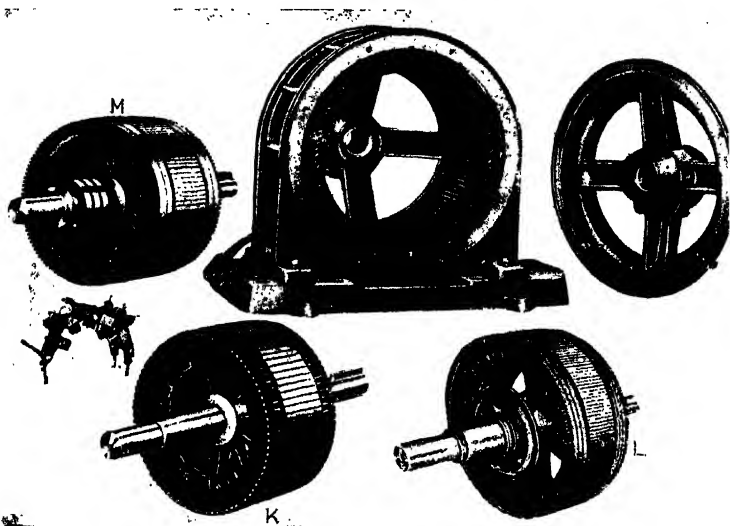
Rotor *K* is a squirrel-cage type of rotor for an induction motor; *L* is a wound rotor with extra resistances mounted within, and *M* is a wound rotor to be connected with extra resistances through the collecting-rings. *General Electric Co.
